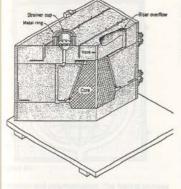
Three-part mold sectioned to reveal riser and off-set sprue
